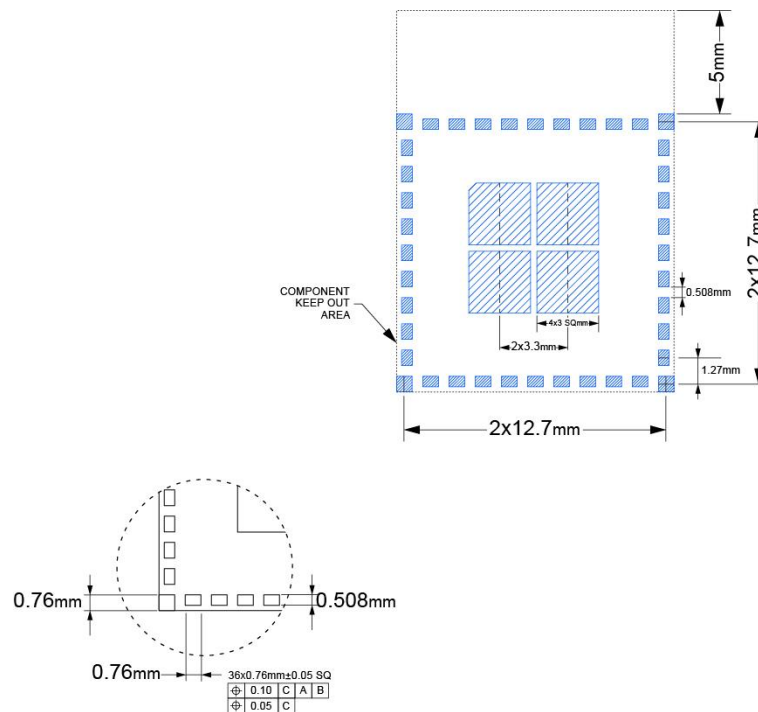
CQM730-0-50-1B Module PCB Landing Pattern
